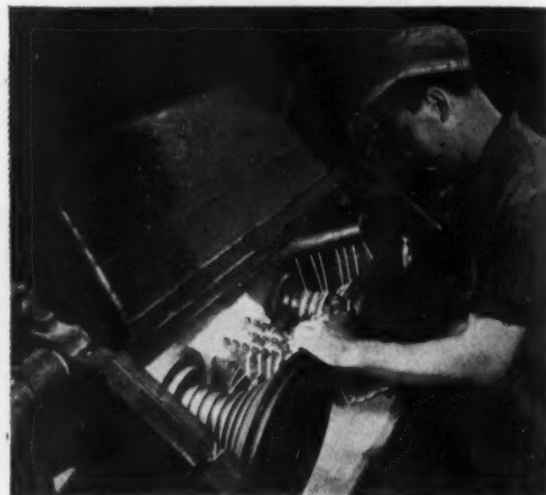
In drawing to finer carbon steel wires, wet wire systems are used. Courtesy Vaughn Machinery Co.
